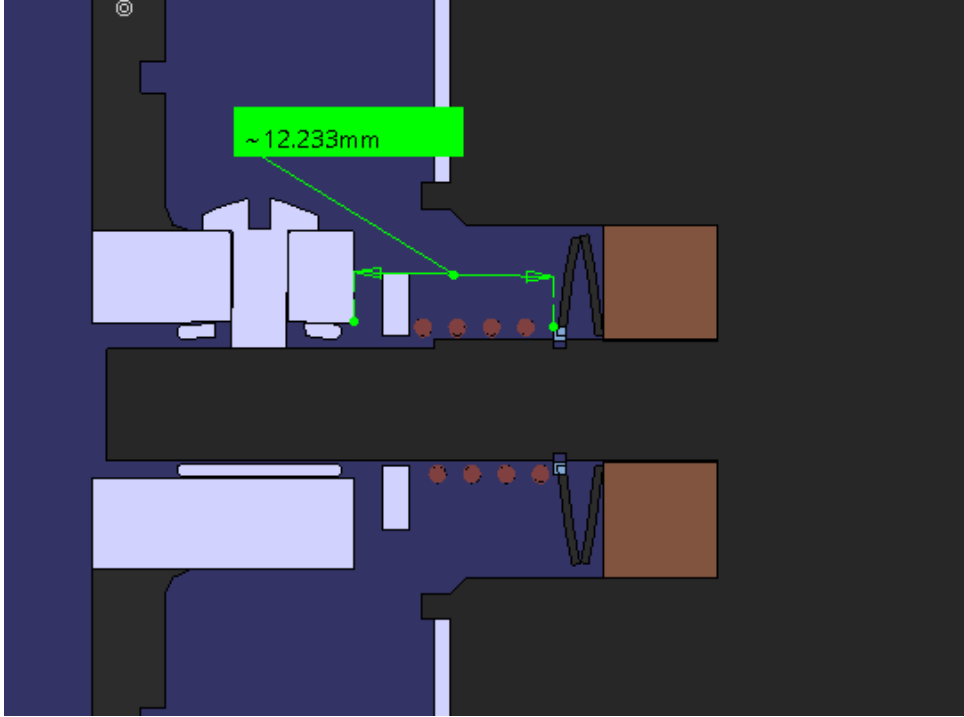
Maximum gap between the circlip and the turbine–motor junction piece at the lowest turbine tolerance condition, used as a reference for defining the minimum required free length of the spring.
